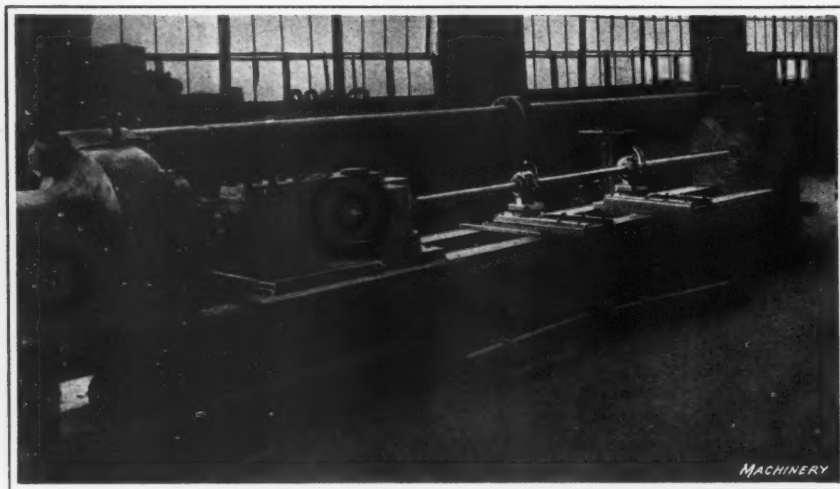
Special Hydraulic Extrusion Press on which Large Billets are reduced to a Point where they can be handled on the Tube Drawing Benches
